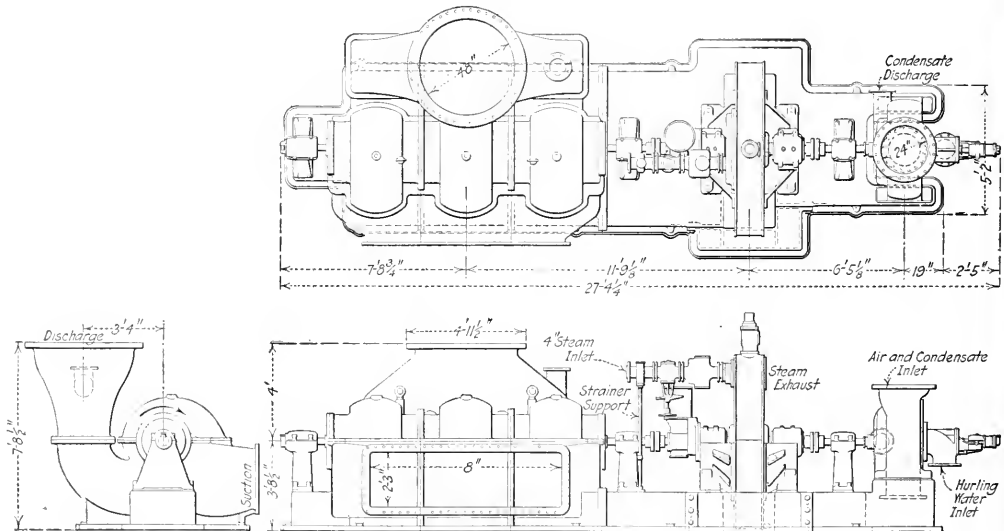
PLAN, END AND LONGITUDINAL ELEVATION OF TURBINE-DRIVEN PUMPS
